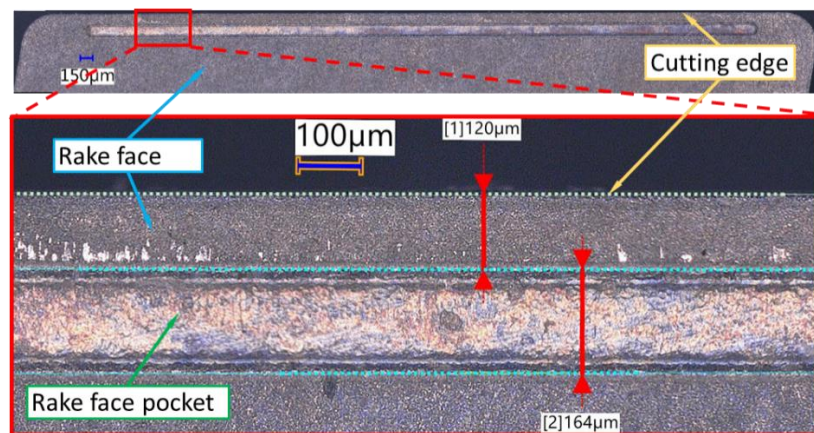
Laser modified cutting edge: view on the rake face with the cutting edge on top and close-up with distance and width measurement of the pocket
